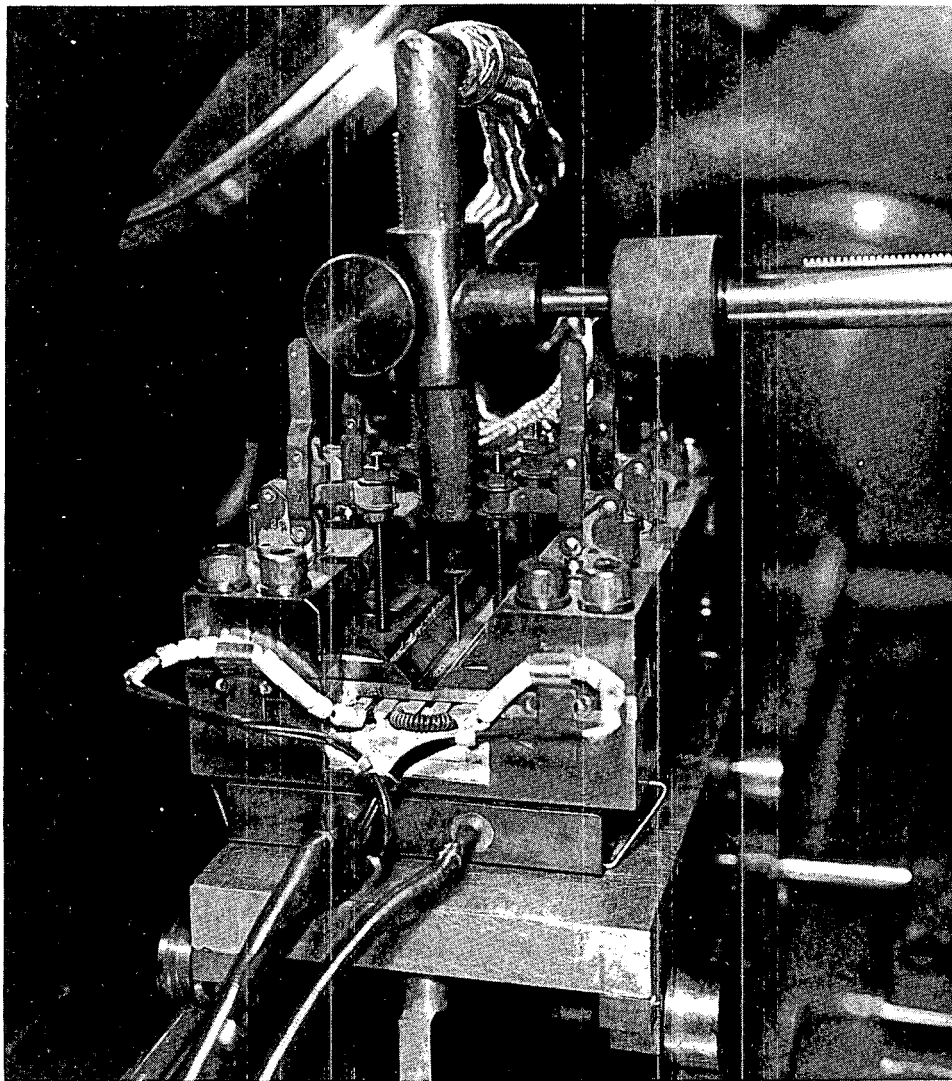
Sheet welding fixture used for welding tungsten-base alloys with preheat to 1400° F.
